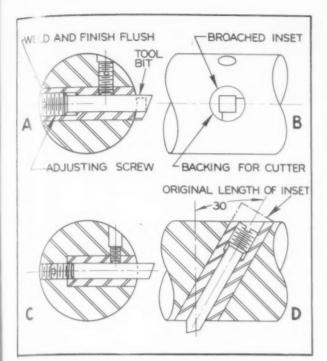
Instead of broaching square holes in boring bars, to suit standard tool-bits, standardized broached insets require only rearning a hole to suit the 0.D. of the inset, which is pressed into place and, preferably, brazed or welded to the bar for greater security. The tool bits should be backed up, as shown, and this backing may be provided by the inset itself, as shown at A and B. Threads for adjusting screws may be tapped directly into the inset, as shown at A, or, the inset may be pressed in partway and the bar itself tapped, but to smaller size, as shown at C. At A, the inset is shown set straight across in the bar, and at C, set at an angle.
